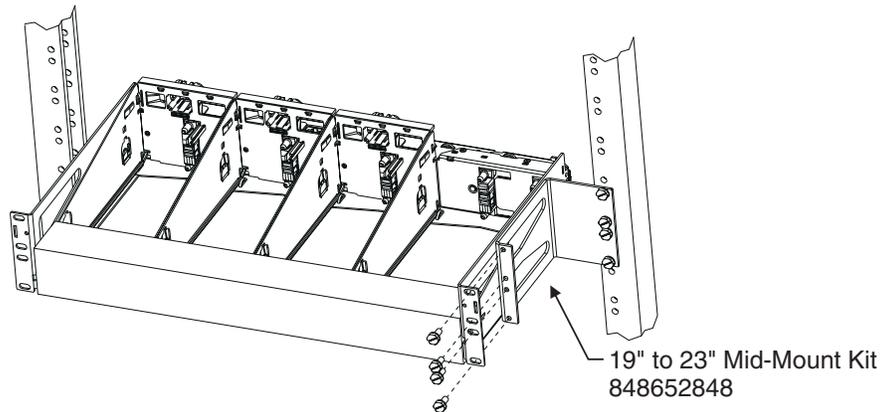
19-inch to 23-inch Mid-Shelf Mounting
